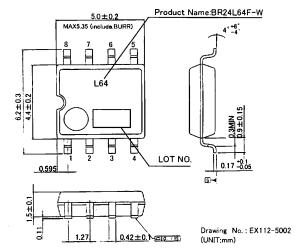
(b) PHYSICAL DIMENSION SOP8 (BR24L64F-W)
